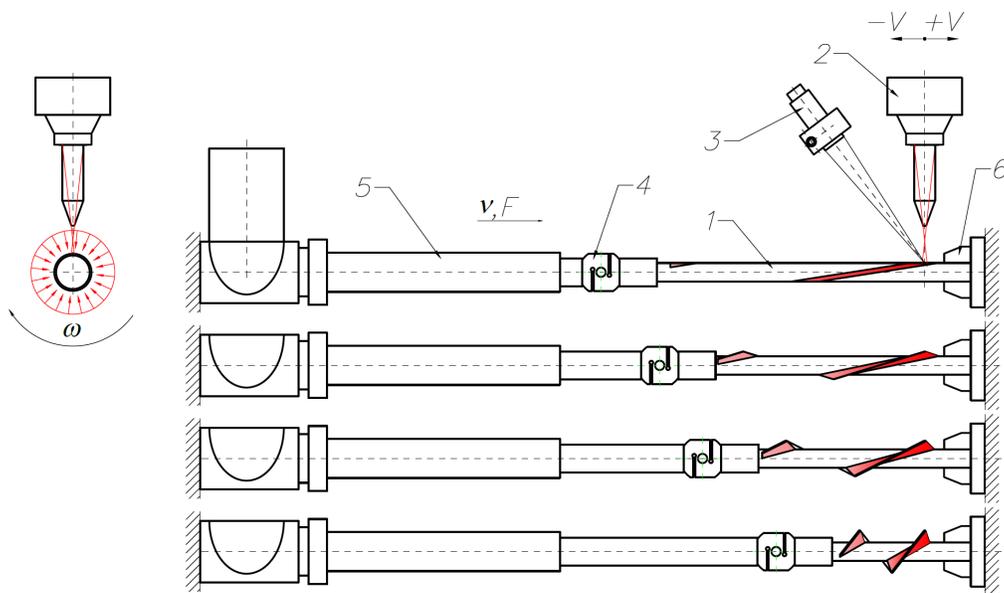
Individual steps of helical expansion joints forming (idea): 1 - quickly rotating around its axis pipe, 2 - laser head (pipe heating), 3 - pyrometer, 4 - force sensor, 5 - axial thrust actuator, 6 - swivel handle. The red line shows laser incidence path with pipe surface.
